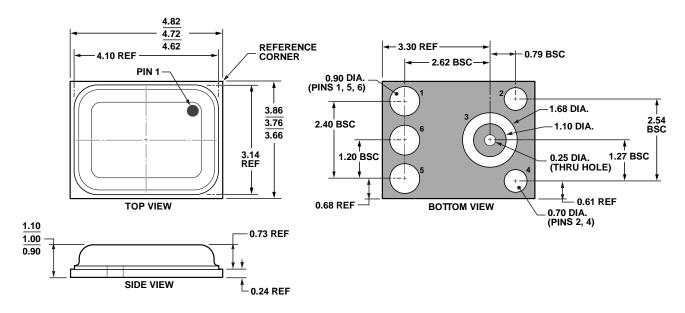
3-Terminal Chip Array Small Outline No-Lead Cavity [LGA\_CAV]  $4.72 \times 3.76 \times 1.00 \text{ mm Body}$  (CE-3-2) Dimensions shown in millimeters
